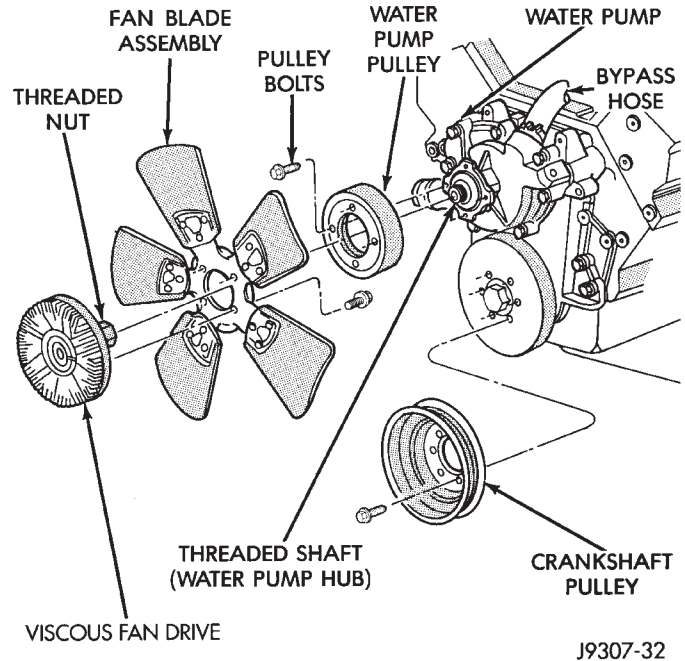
Fan Blade/Viscous Fan Drive—5.2/5.9LV-8 Engines
